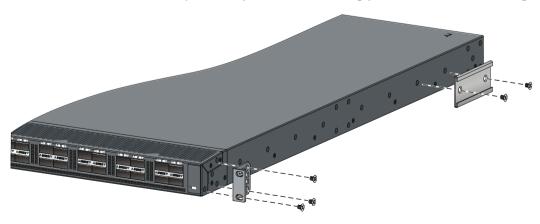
Attaching the mounting brackets and chassis rails to the HPE 5930-2Slot+2QSFP+/HPE 5930-2Slot+2QSFP+ TAA switch (network port-side mounting position for the mounting brackets)
